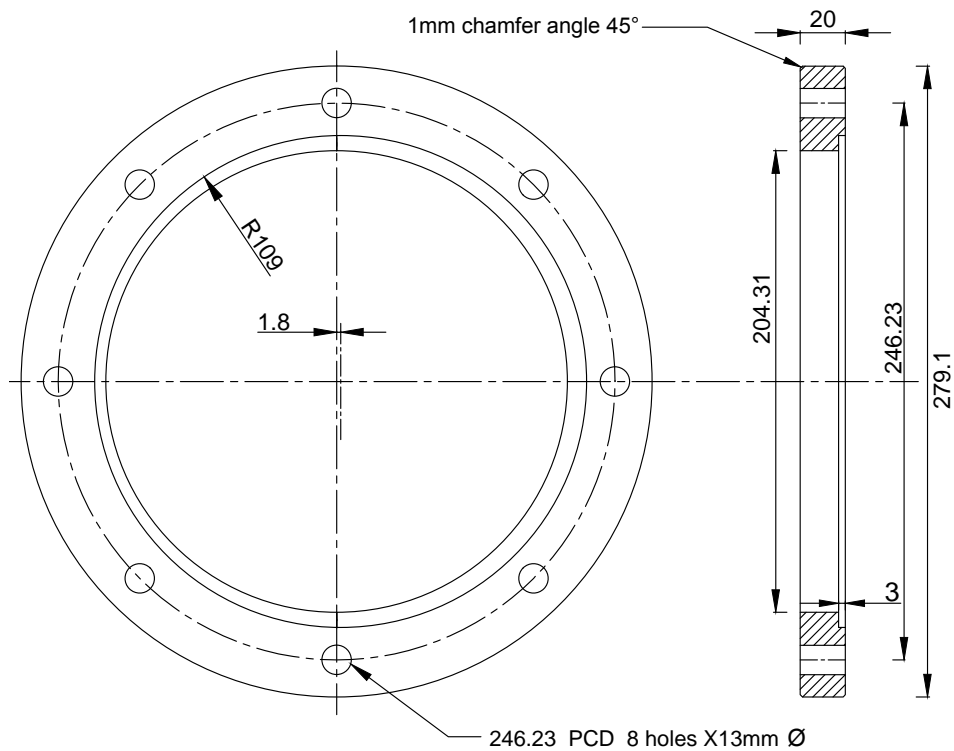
Schematic diagram of the retaining flange and its dimensions.
